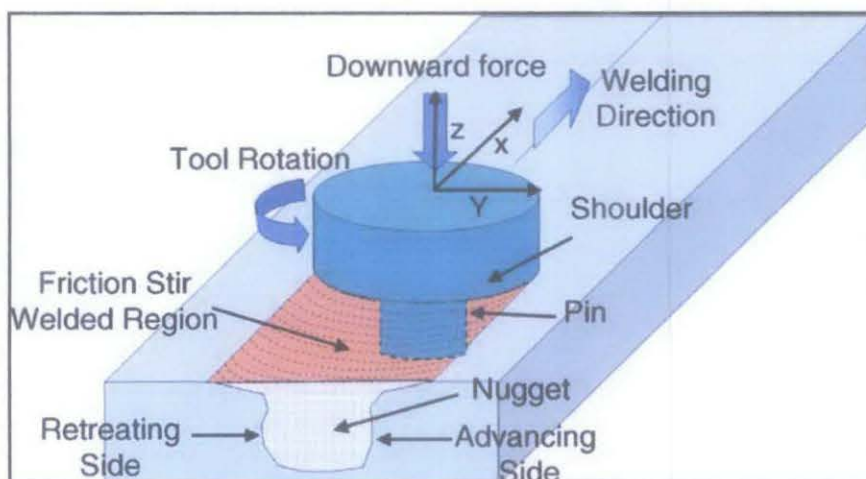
The concept of Friction Stir Welding process.
